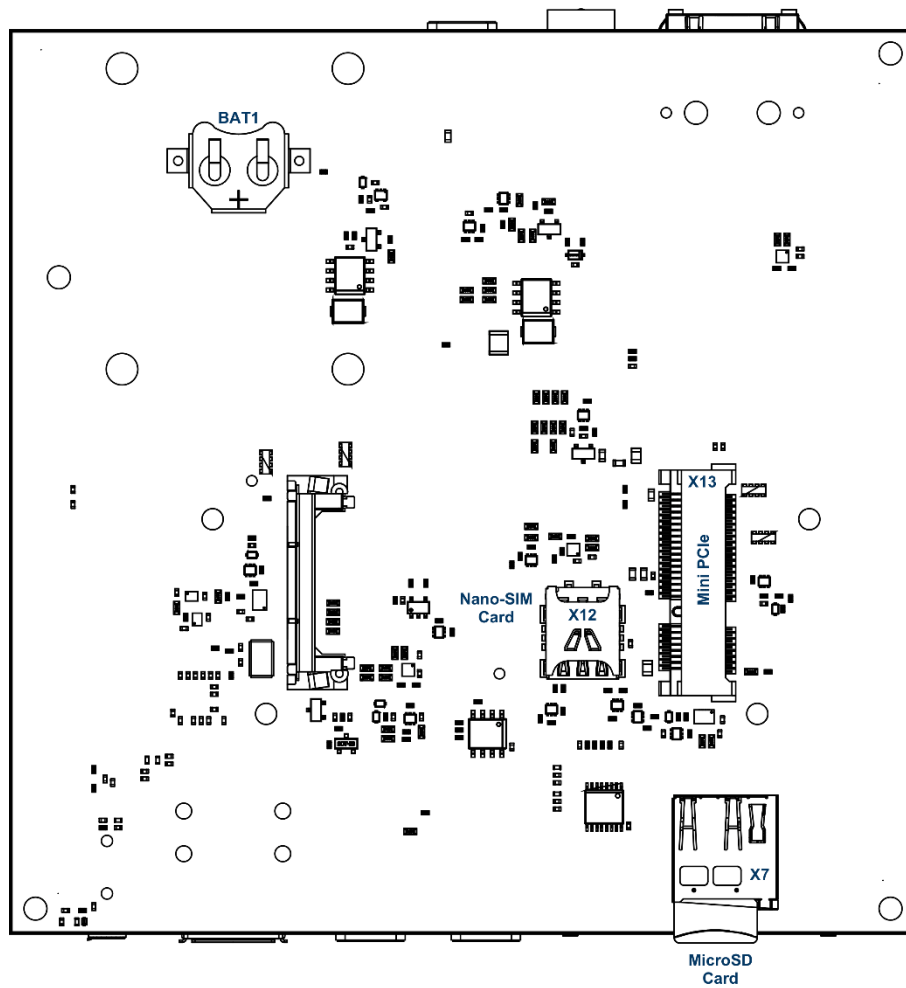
Dahlia Carrier Board Connectors – Bottom Side
